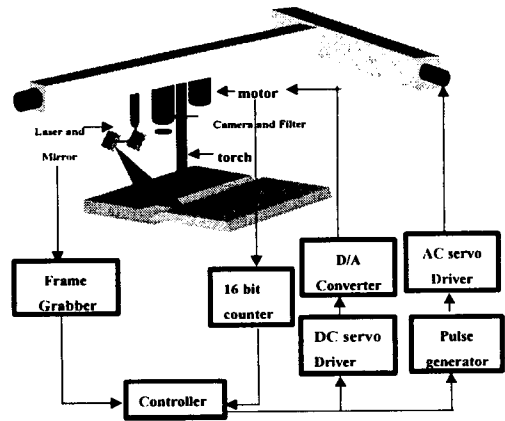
The scheme of automatic welding system using machine vision
